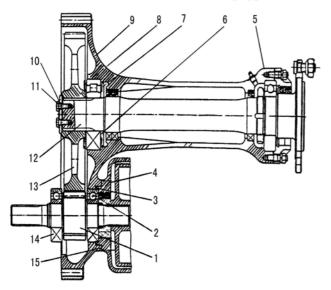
Final transmission assembly 1-final-transmission small gears 2-ball bearing6308N 3-limit ring 4-brake housing 5-bearing213 6-bearingNU311 7-base plate 8-baffle 9-final-transimmion housing 10-safety washer 11-screw12driving shaft 13-final-transmission big gears 14-bearing6308 15-spacer of
